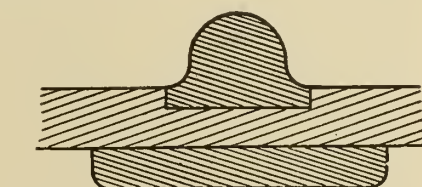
Pattern Inserted in Plate to Provide Good Fillets.
